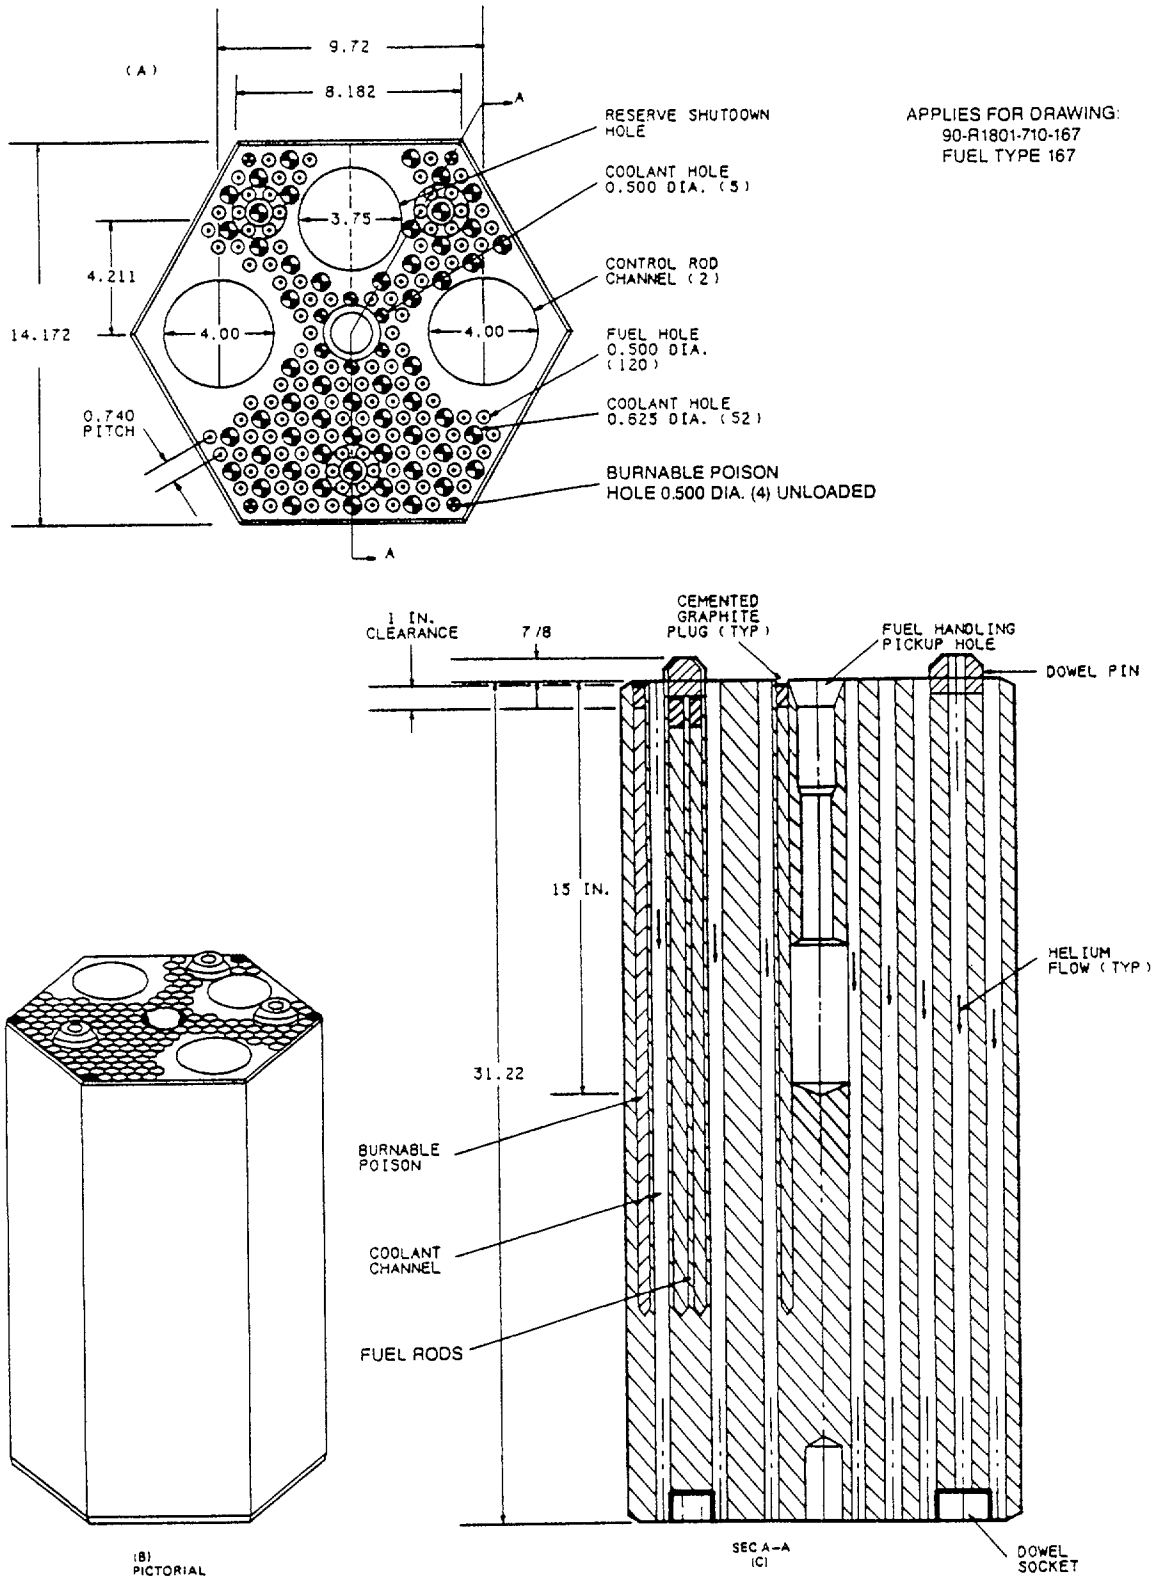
C.10. Bottom control fuel element with enlarged pickup hole.
